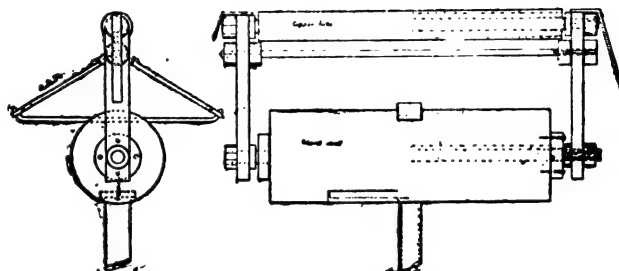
DETAILS OF TROLLEY CONSTRUCTION.
